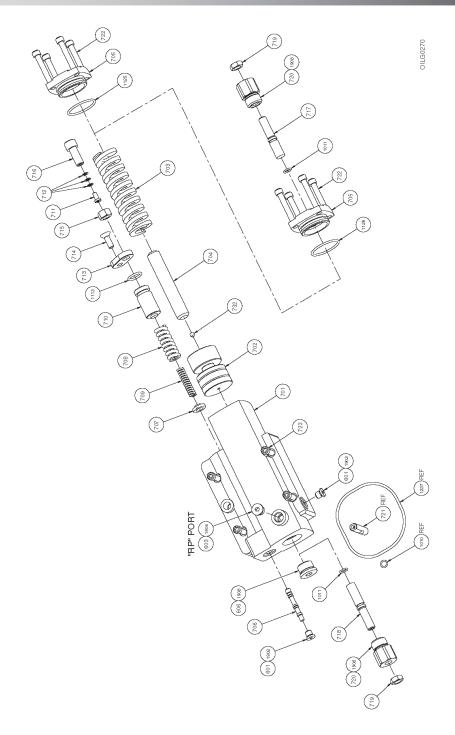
Exploded Parts Drawing for "P-1NN" and "P-LNN" Control (519975-201 sheet 2)
